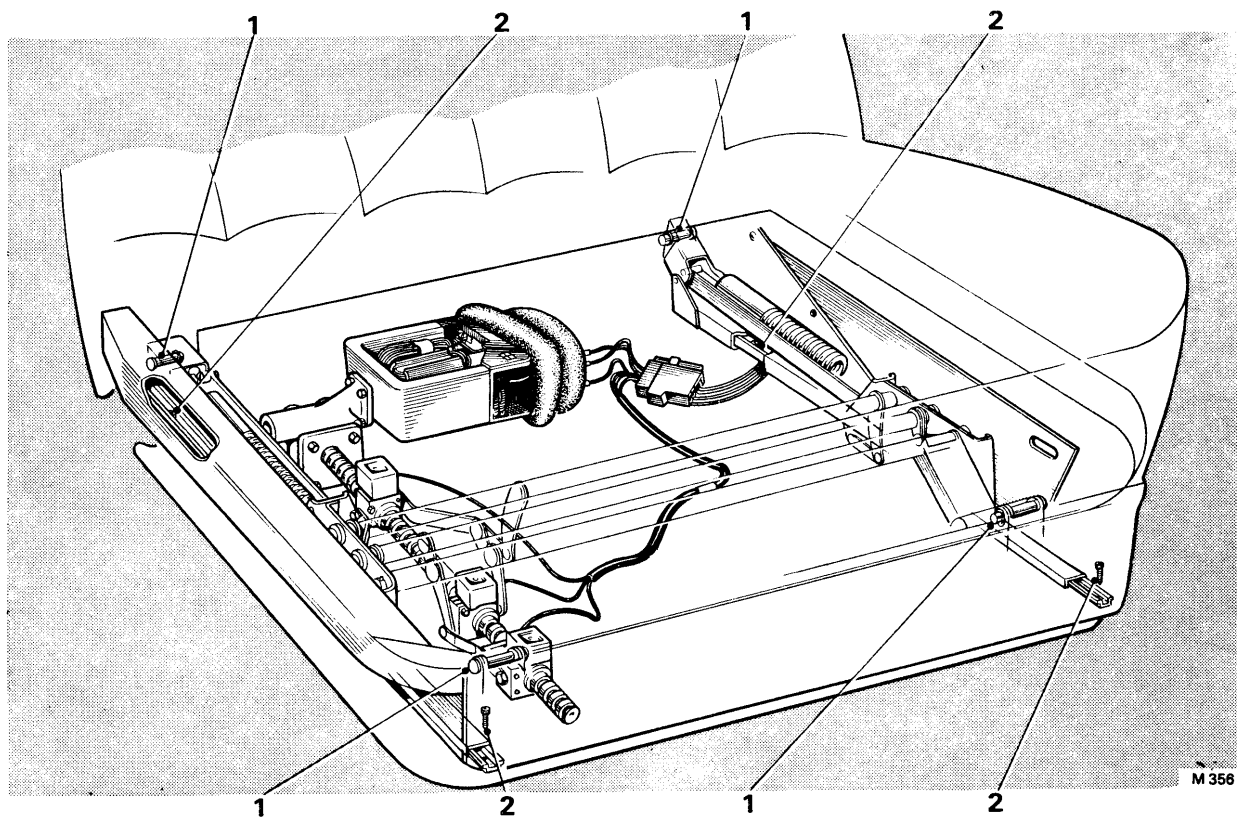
FRONT SEAT MECHANISM (4-Door Saloon and Long Wheelbase Cars prior to Car Serial Number 6001)
